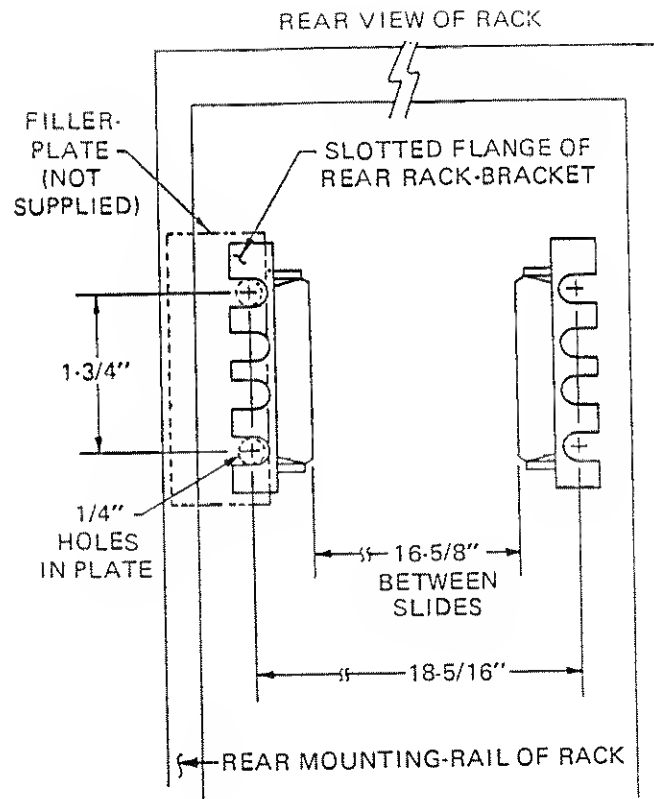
Rear End Slide-Mount Rack Dimensions
